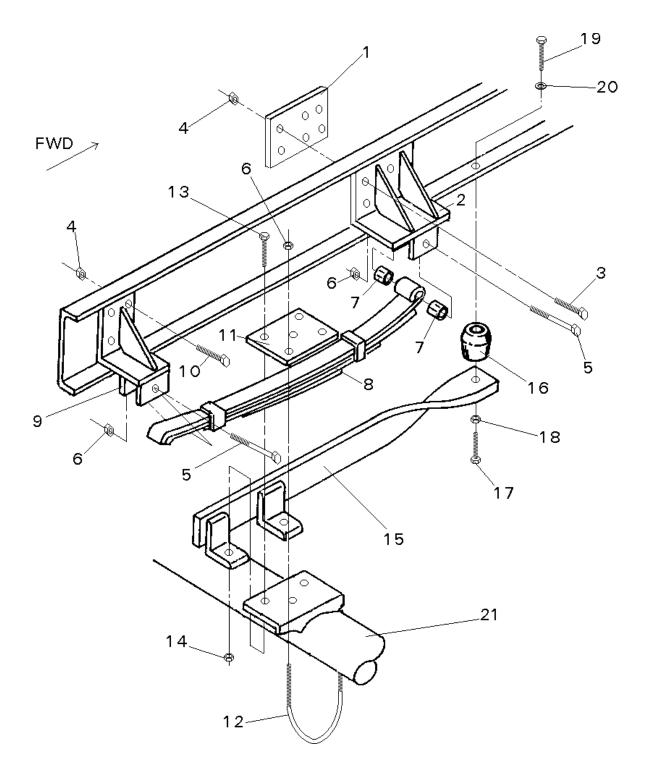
Drive Axle Installation, Spring Mount, SerialNumbers 178 Through 926
